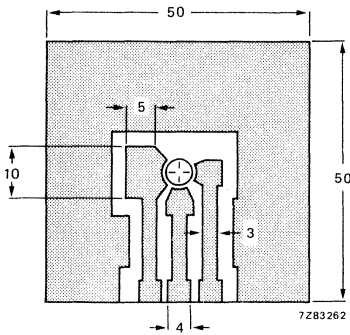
Requirements for fibre-glass print (dimensions in mm). Single-sided 35 μm Cu-clad epoxy fibre-glass print, thickness 1,5 mm. Tracks are fully tin-lead plated. Shaded area is Cu.
